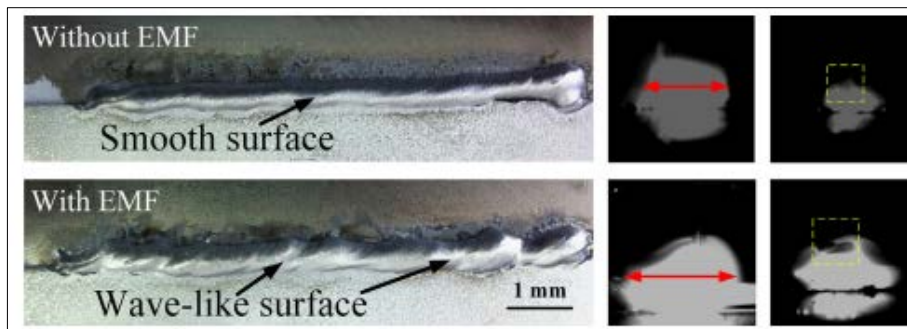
Weld appearance and morphologies of weld arc and molten drop.
